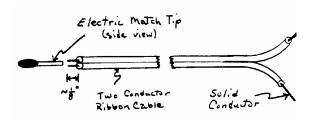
Sketch of two-conductor ribbon cable prepared for soldering to electric match tip.
